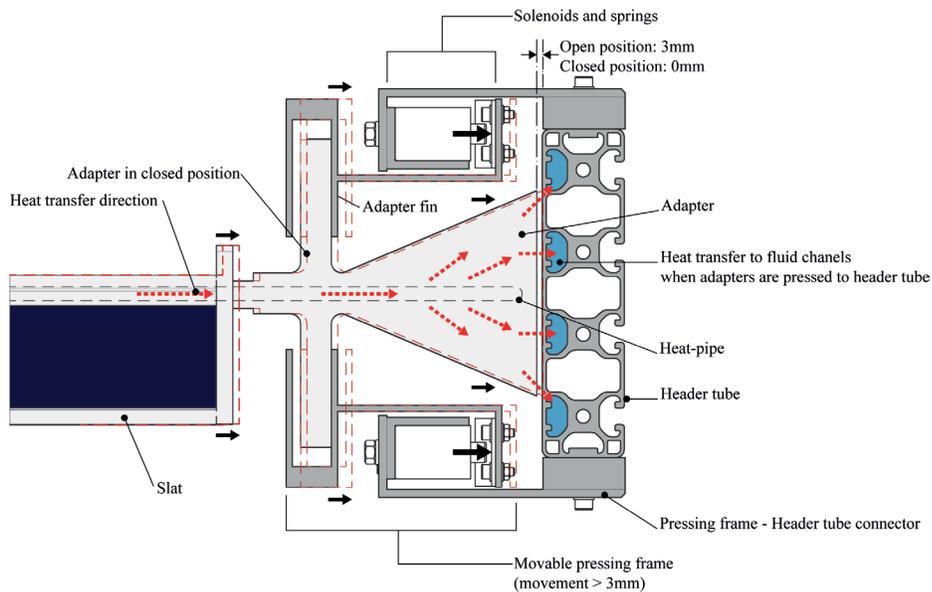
Schematic horizontal cross-section of the switchable thermal coupling mechanism used as heat transfer component in the STVB test sample. Red arrows indicate the heat flow from slat through heat pipe and adapter to the fluid in the header tube. Black arrows indicate the movement of the switchable thermal coupling mechanism from open to closed position. The dashed red lines indicate the position of slat, adapter, and movable pressing frame when the switchable thermal coupling is closed.
